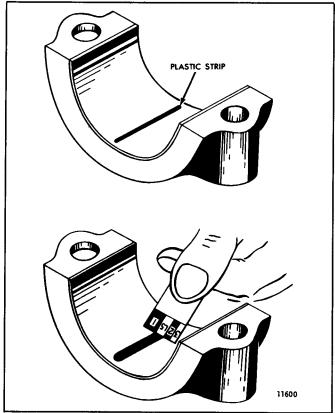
Using Plastic Strip to Measure Bearing-to-Crankshaft Clearance
